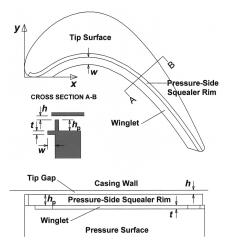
Pressure-side squealer tip equipped with pressure-side winglet to be tested
